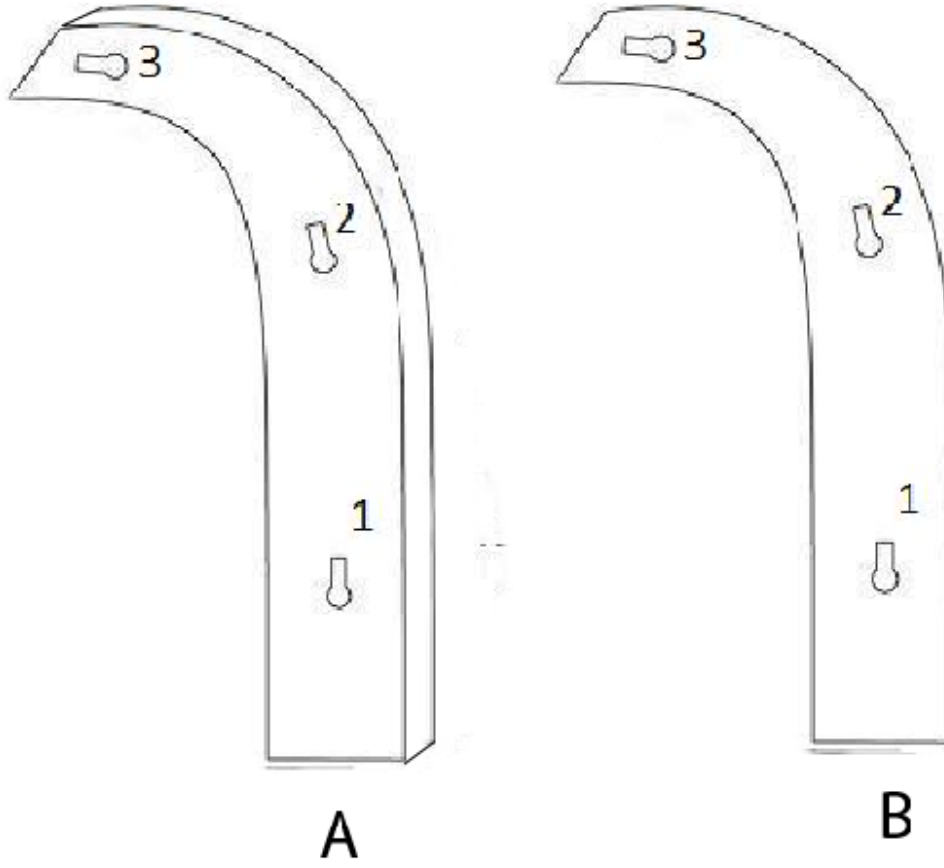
Sensor Panel Body & Cover on the Side of the Faucet
